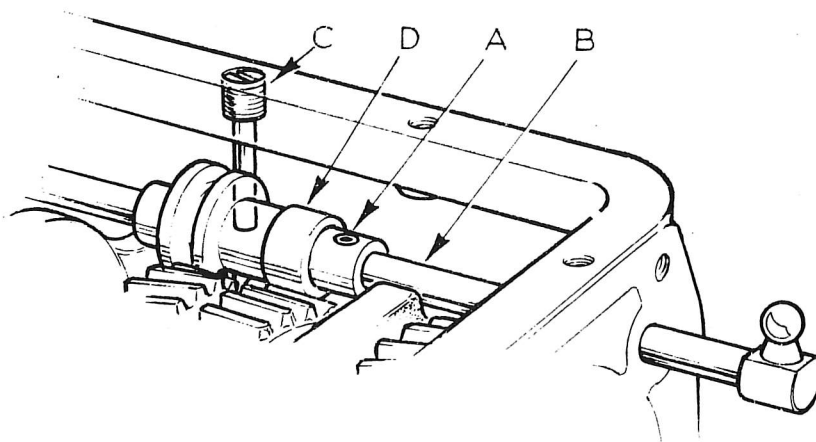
INTERLOCK SPOOL AND SELECTOR SHAFT
